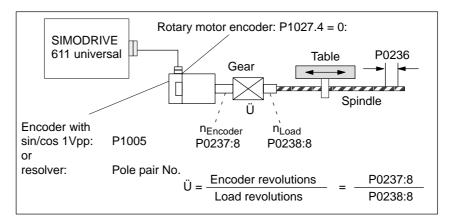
Linear axis with rotary motor encoder (ballscrew)
